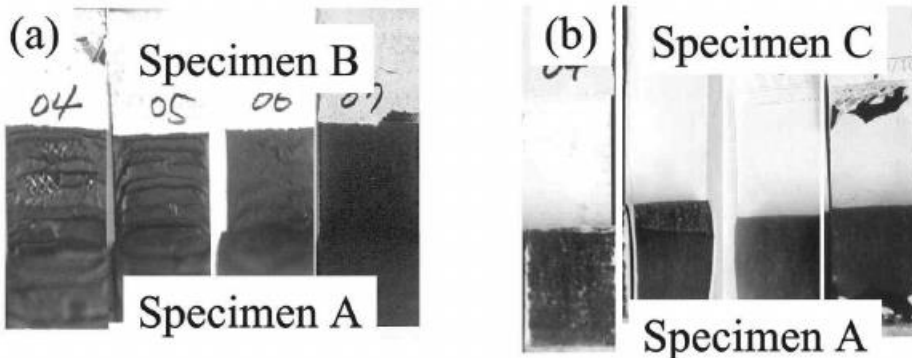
Fracture surface morphology for specimen- A/B and A/C system.
